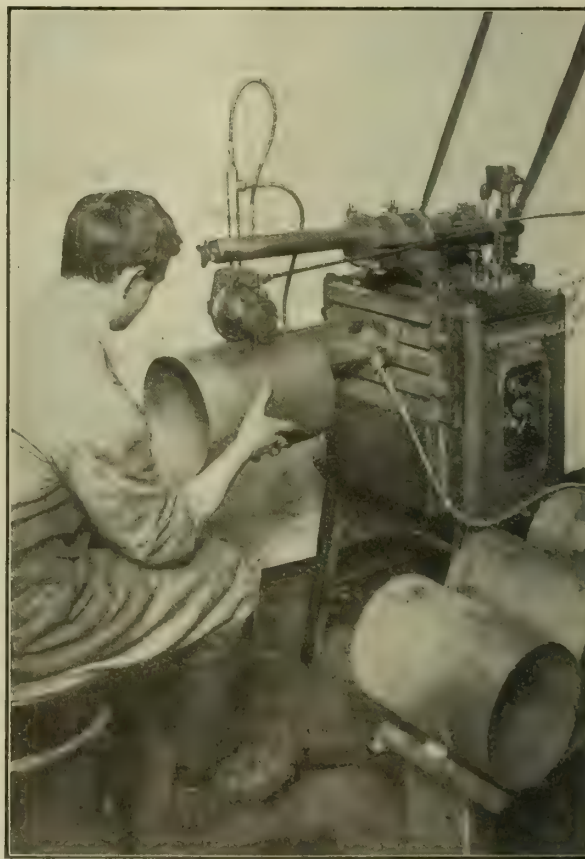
A MARRIAT AND PLACE SEAM WELDER.
